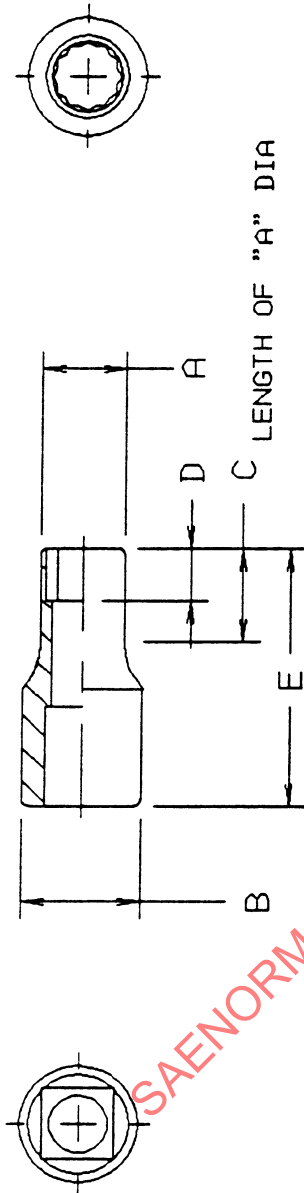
Type I, Class 1 Socket Dimensions (Dimensions in Inches)
